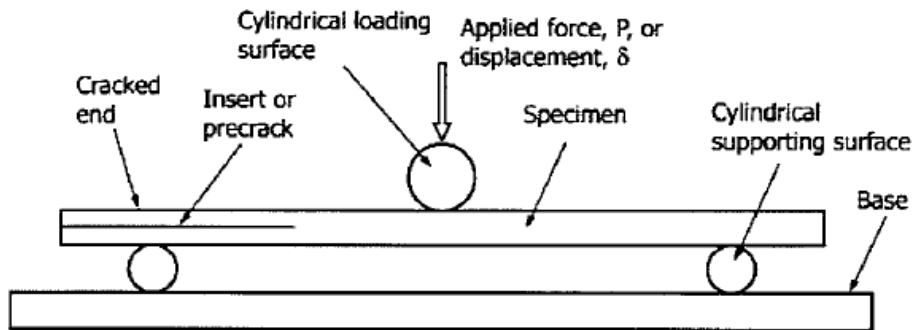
ENF Test Fixture and Specimen Nomenclature
